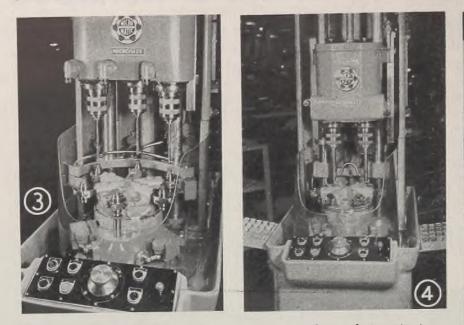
Three-spindle hydraulic production honing machine with six-station indexing table. As table indexes, bushings move under rough, semifinish and finish honing spindles in sequence
